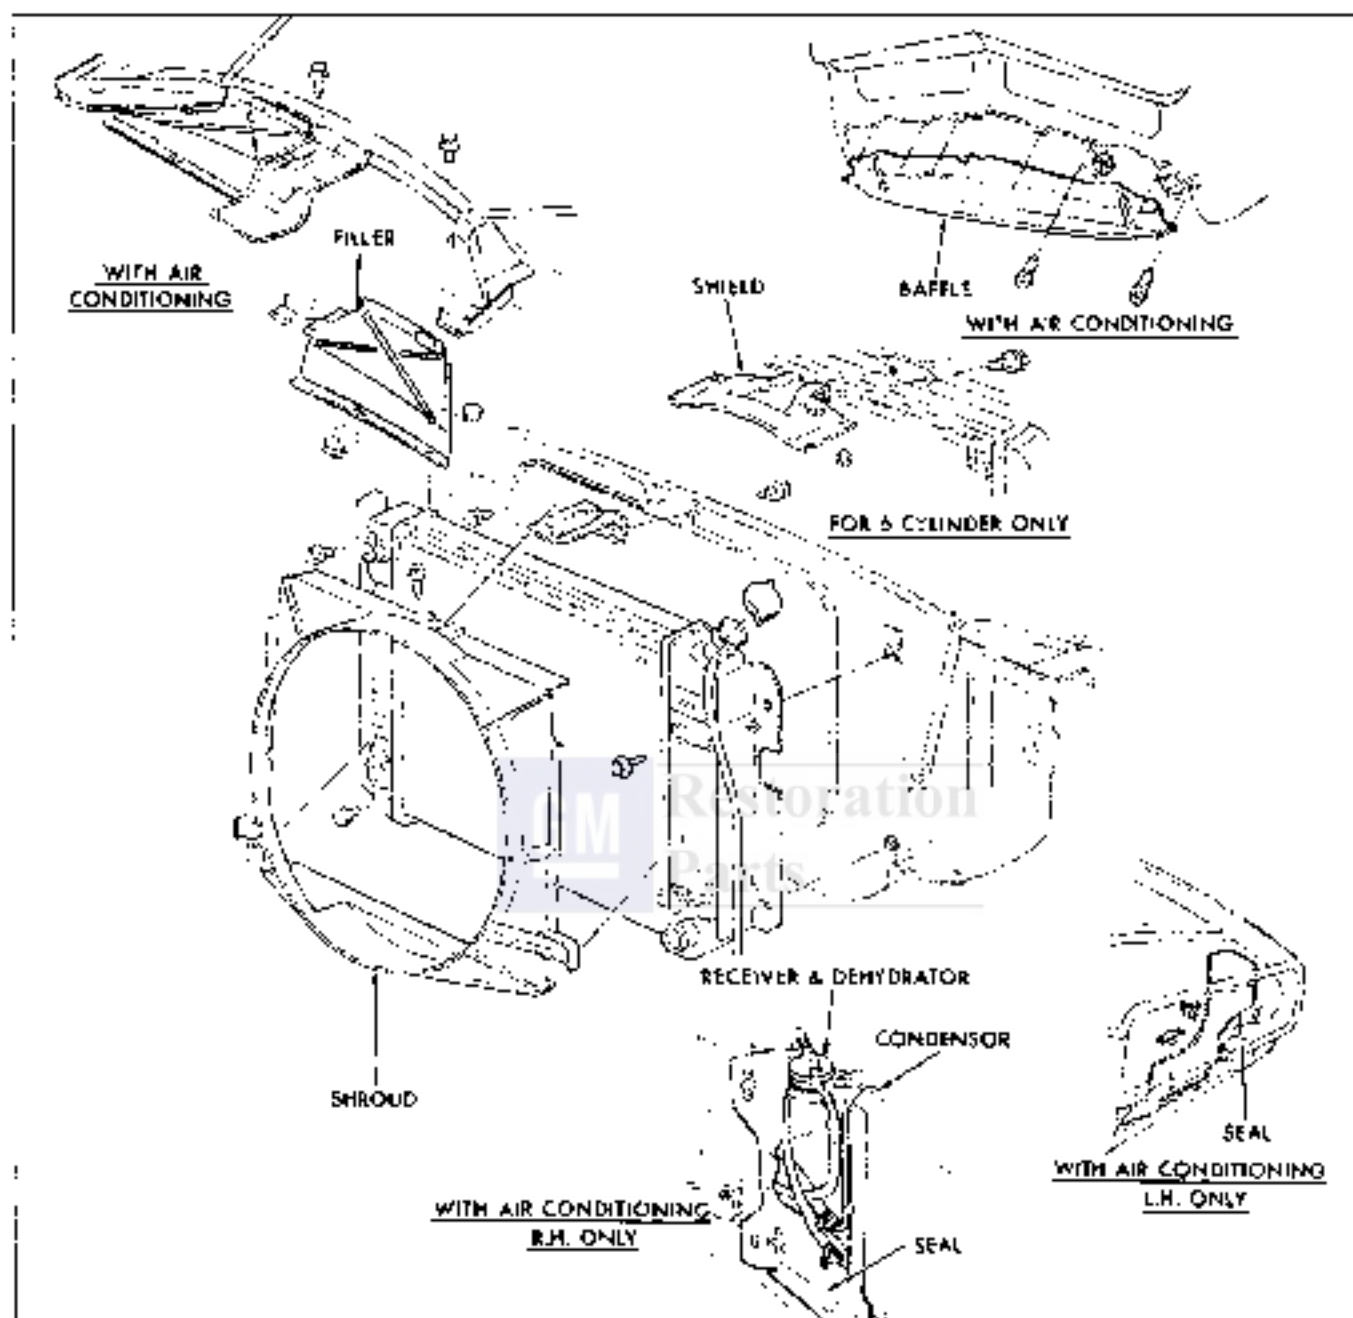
A-3 Radiator Support and Baffle Assembly - Firebird
